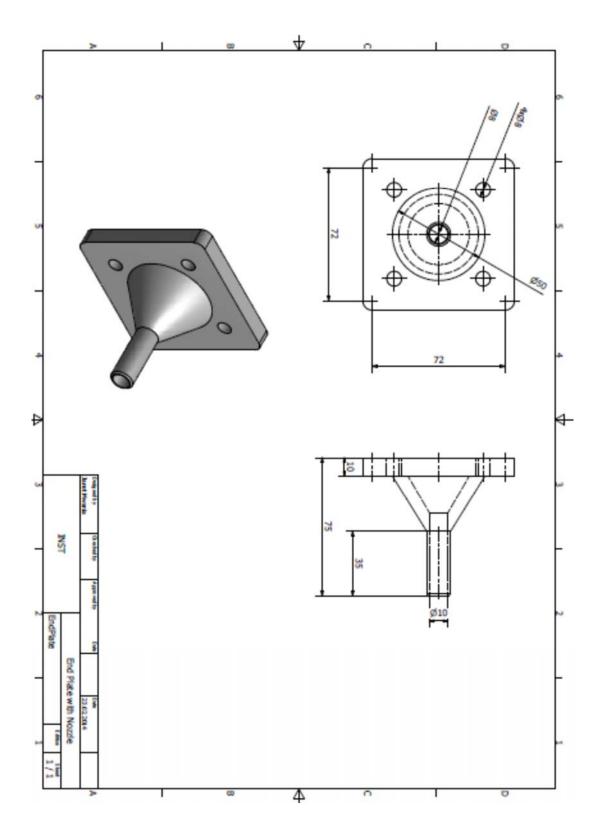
3D image of the nozzle and Front and End elevations showing dimensions (mm)
